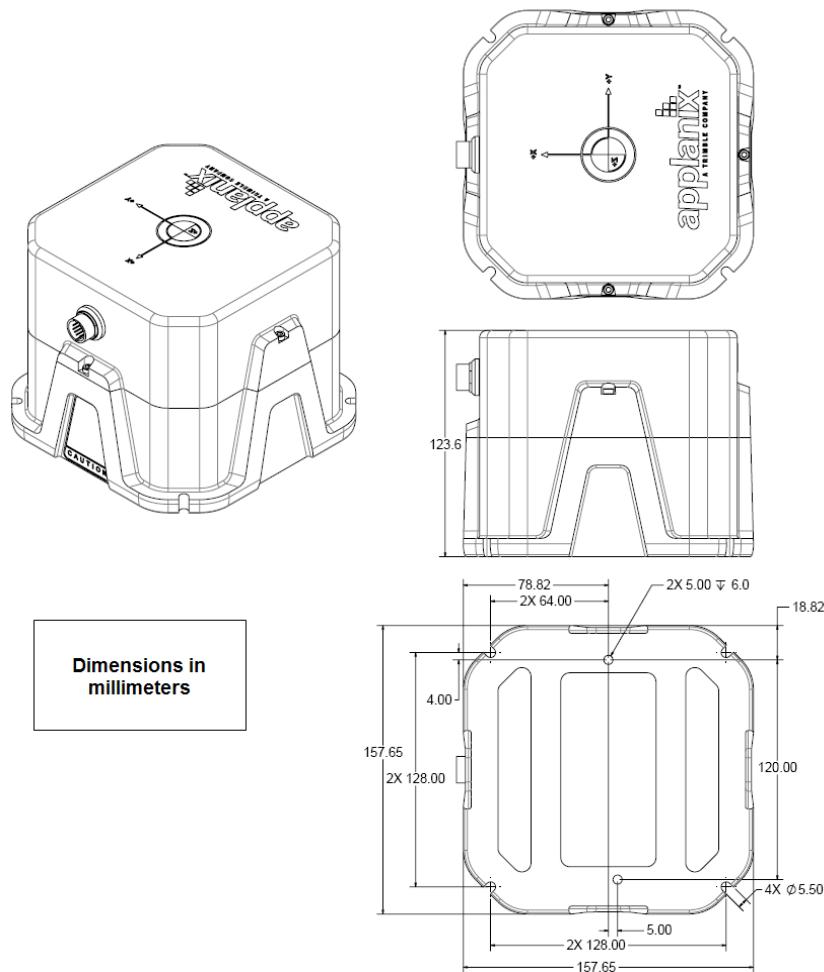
IMU Type 7, 17 & 42 Outline - Top, Side and Bottom Views
